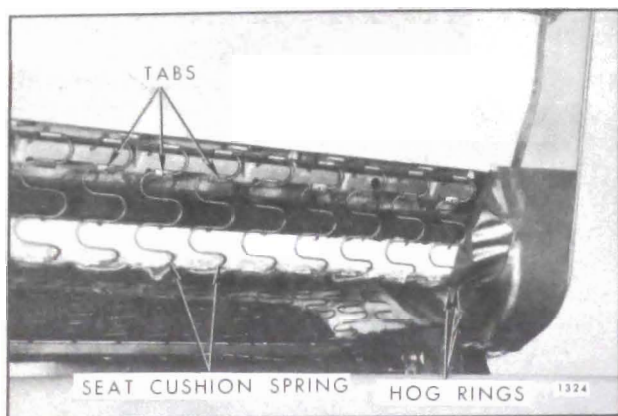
Seat Cushion-to-Back Spring Attachment
